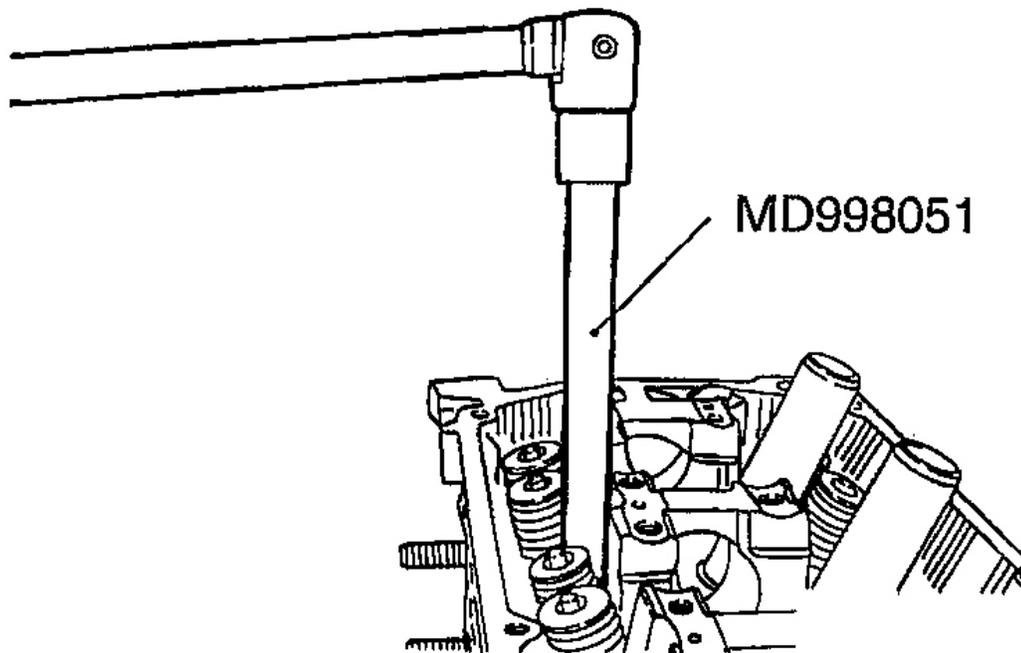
Removing & Installing Cylinder Head And Valves
